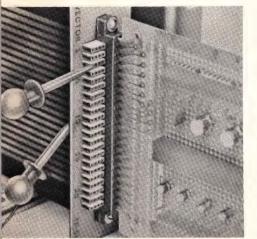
This novel adapter simplifies testing. Test equipment or components can be connected to the board without soldering.
